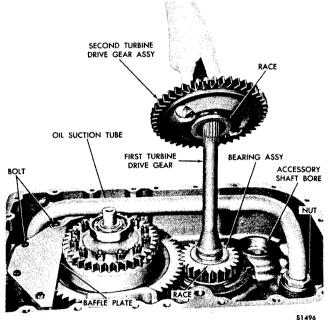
Installing second-turbine driven gear assembly (-3 model)
